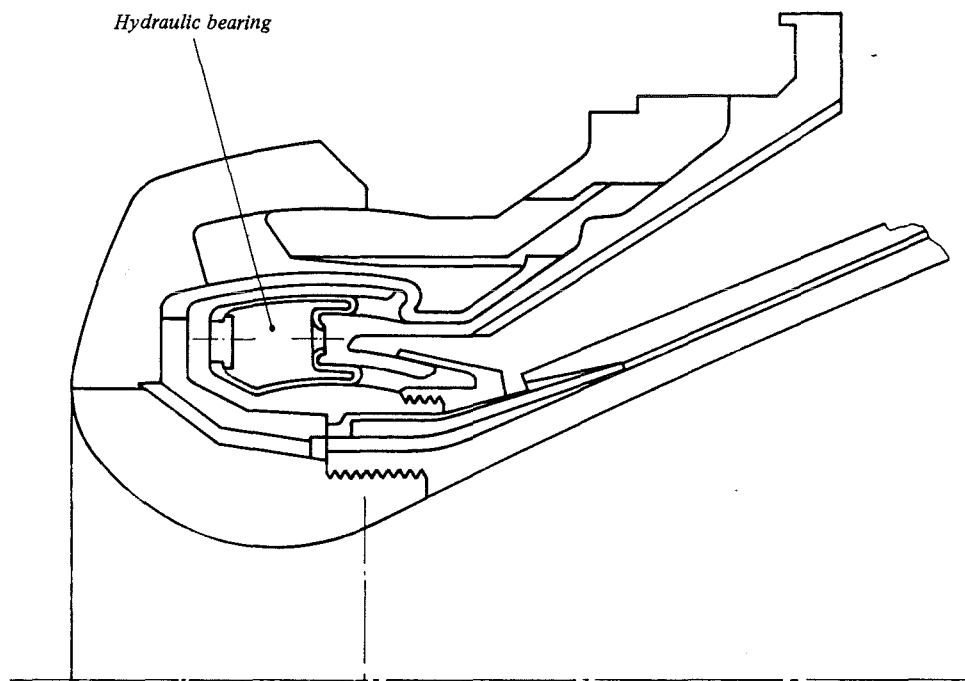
HYDRAULIC BEARING - PRINCIPLE
